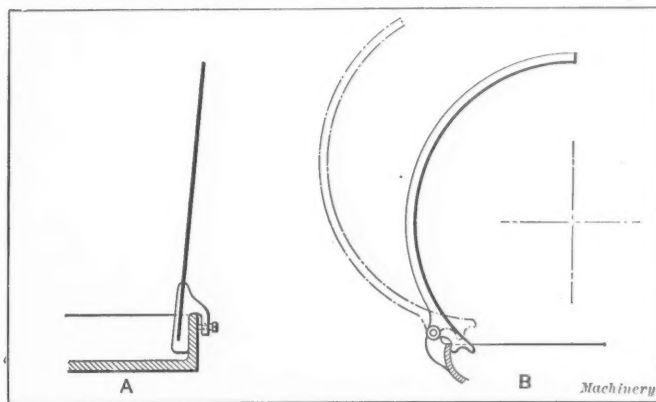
Detachable and Pivoted Splash Guards or Plates
